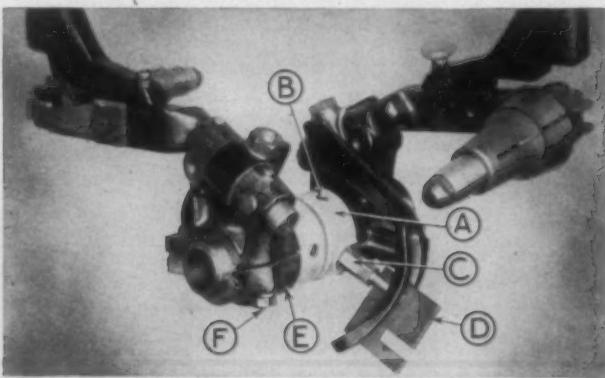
Builder Cam Lever Gauge 44-418-2CA
